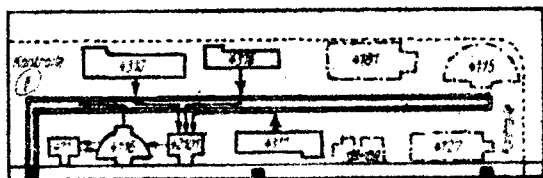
Machine Plan of the Cylinder Head Route (Present Condition)
